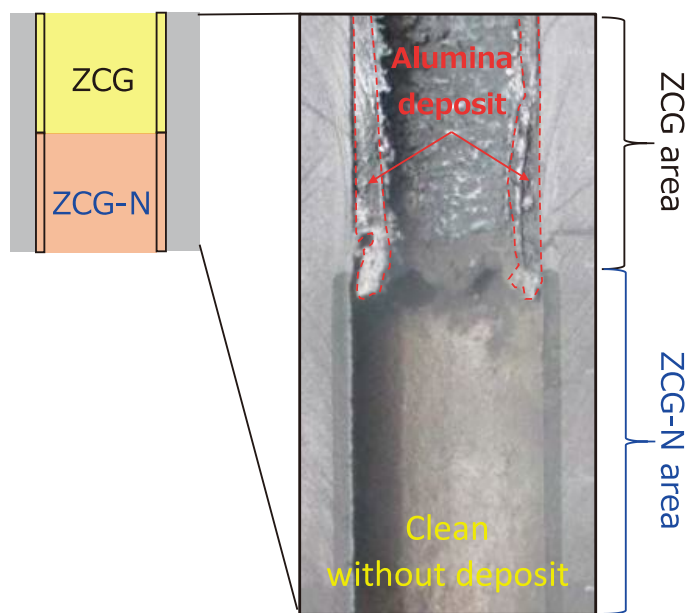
Cross section of nozzle after casting test using actual production facility.
